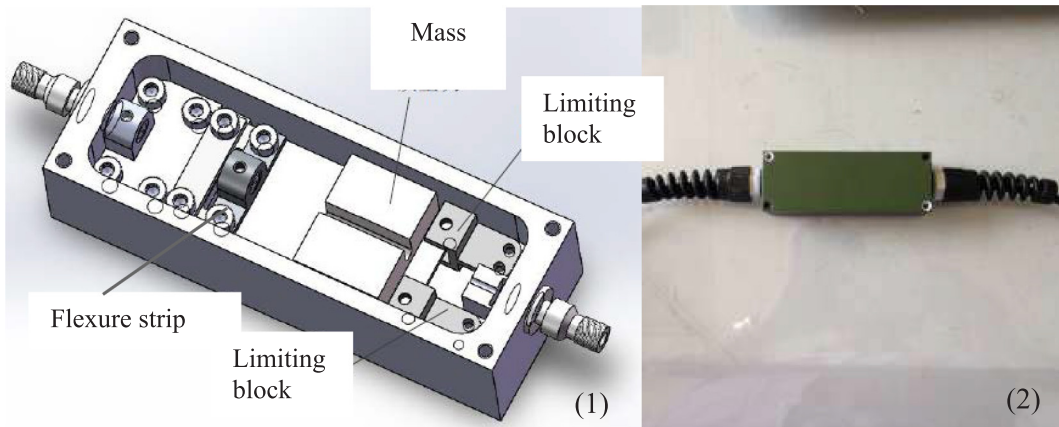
(1) 3D assembly drawing and (2) photograph of FBG based geophone.
